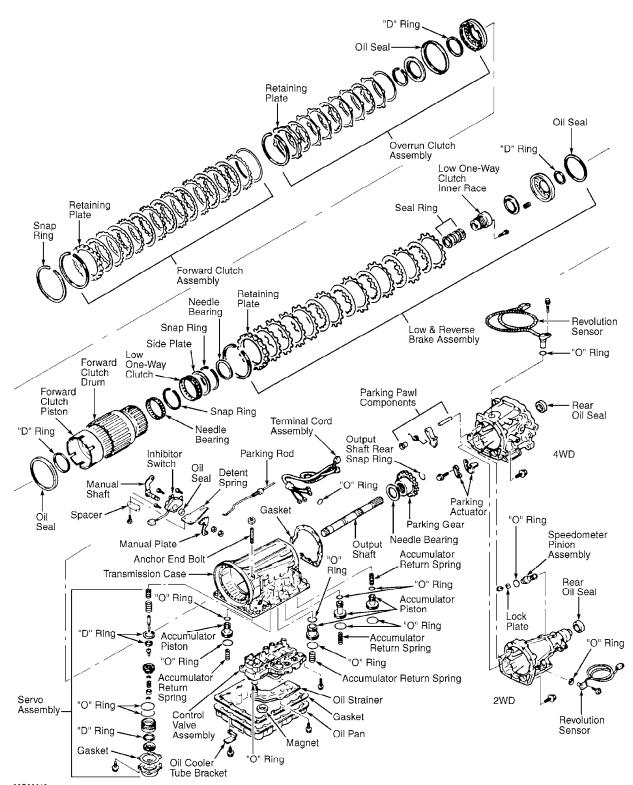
Exploded View Of A/T Case Components (RE4R01A & RE4R03A) Courtesy of Nissan Motor Co., U.S.A.
